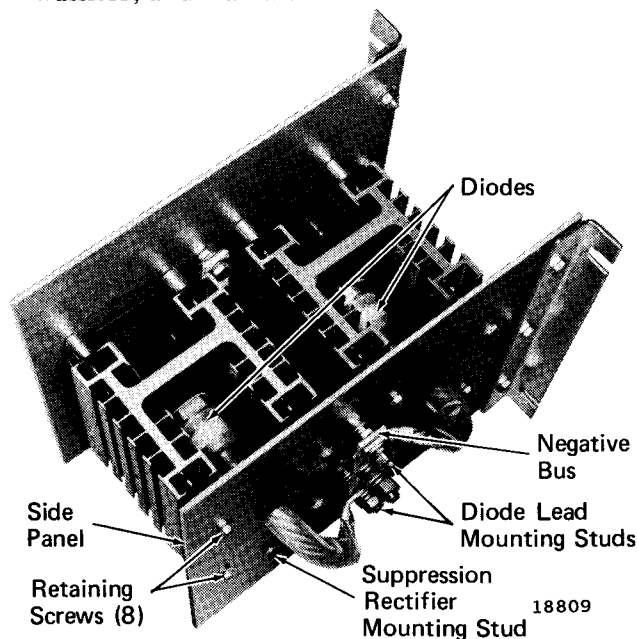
Battery Charging Rectifier Assembly 8416095
